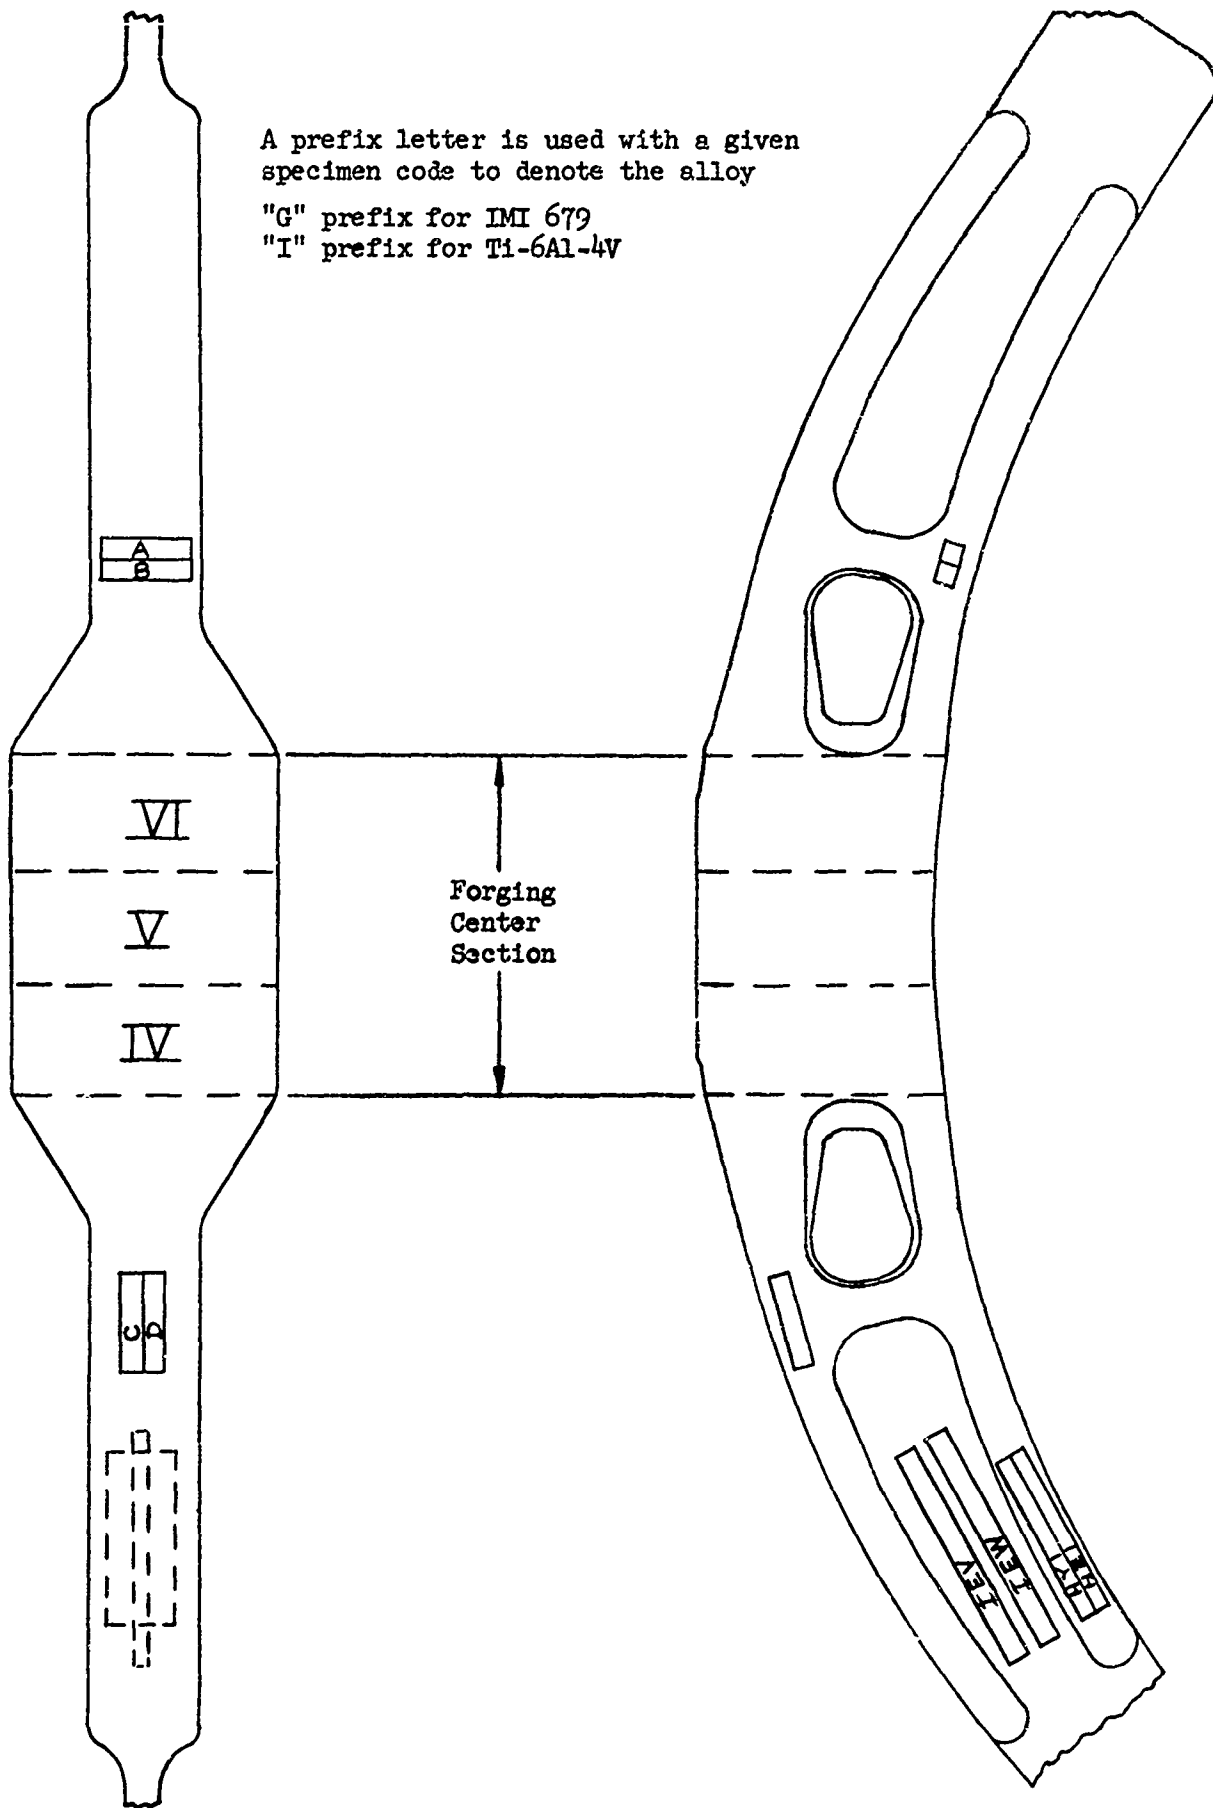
Specimen Layout Second Forging IMI 679 and Ti-6Al-4V
